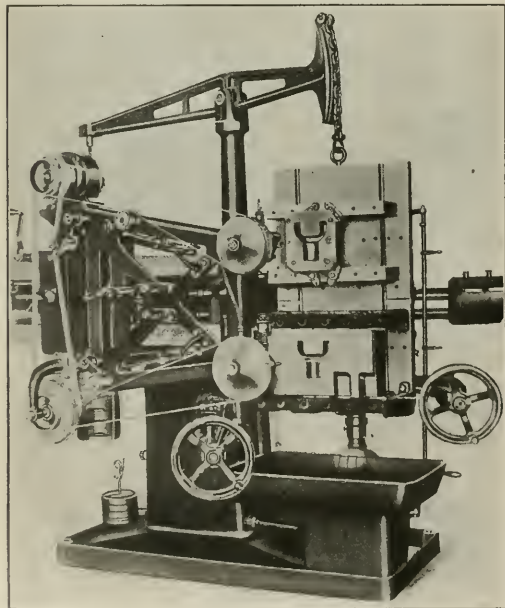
HEAVY TYPE OF DUPLICATING MACHINE
